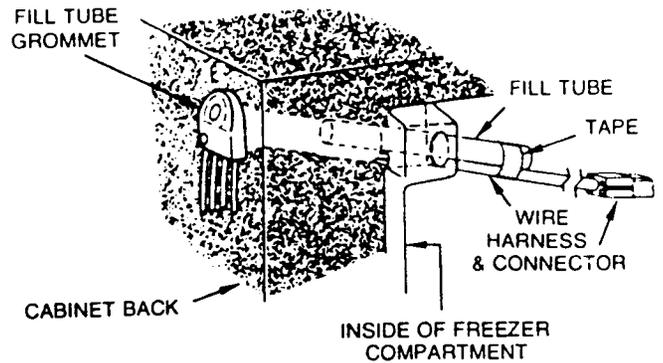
Cross-section view of fill tube grommet and associated parts properly installed
